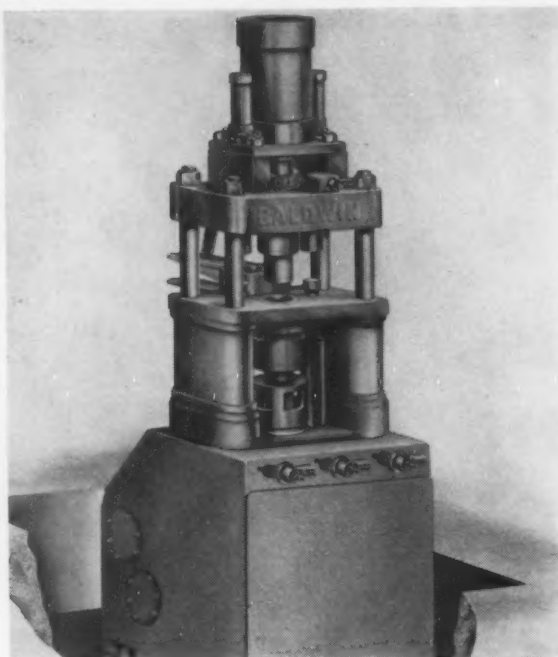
Basically a mechanical press, head is a hydraulic cylinder. Piston contacts upper ram.
